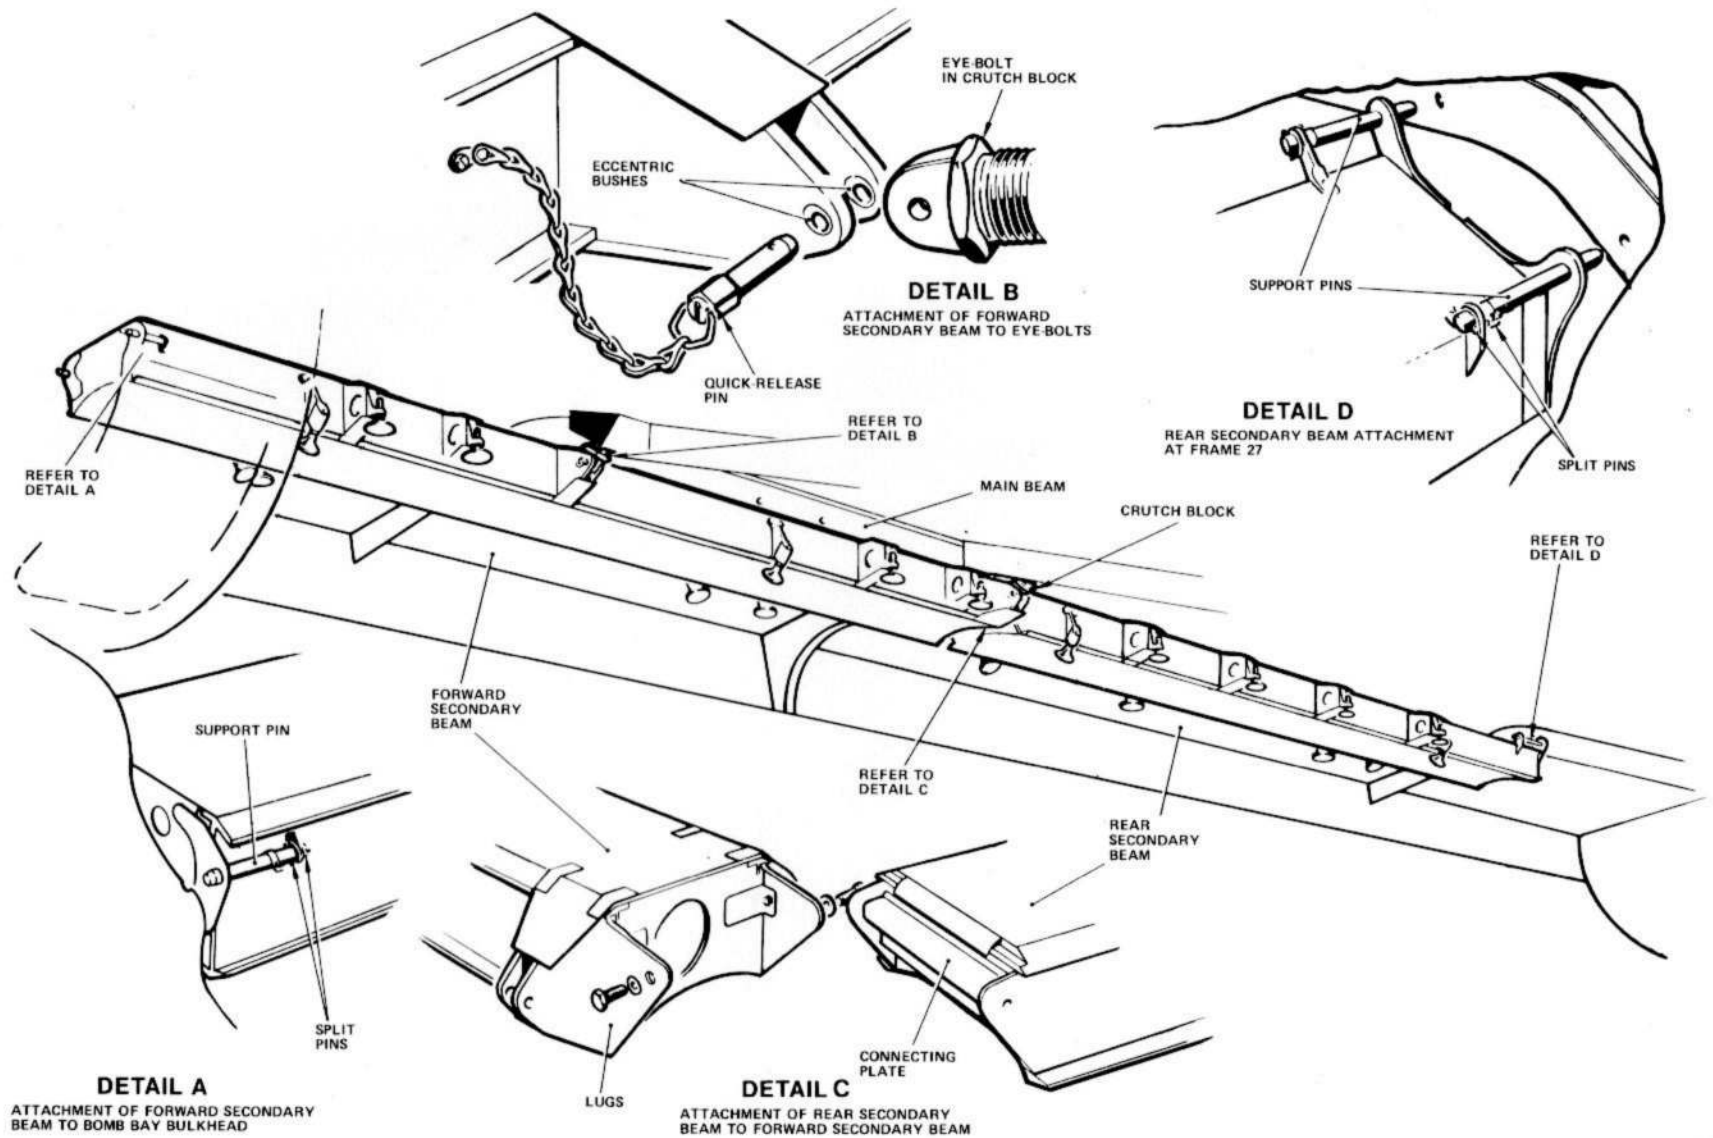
BOMB BEAMS - REMOVAL AND ASSEMBLY
